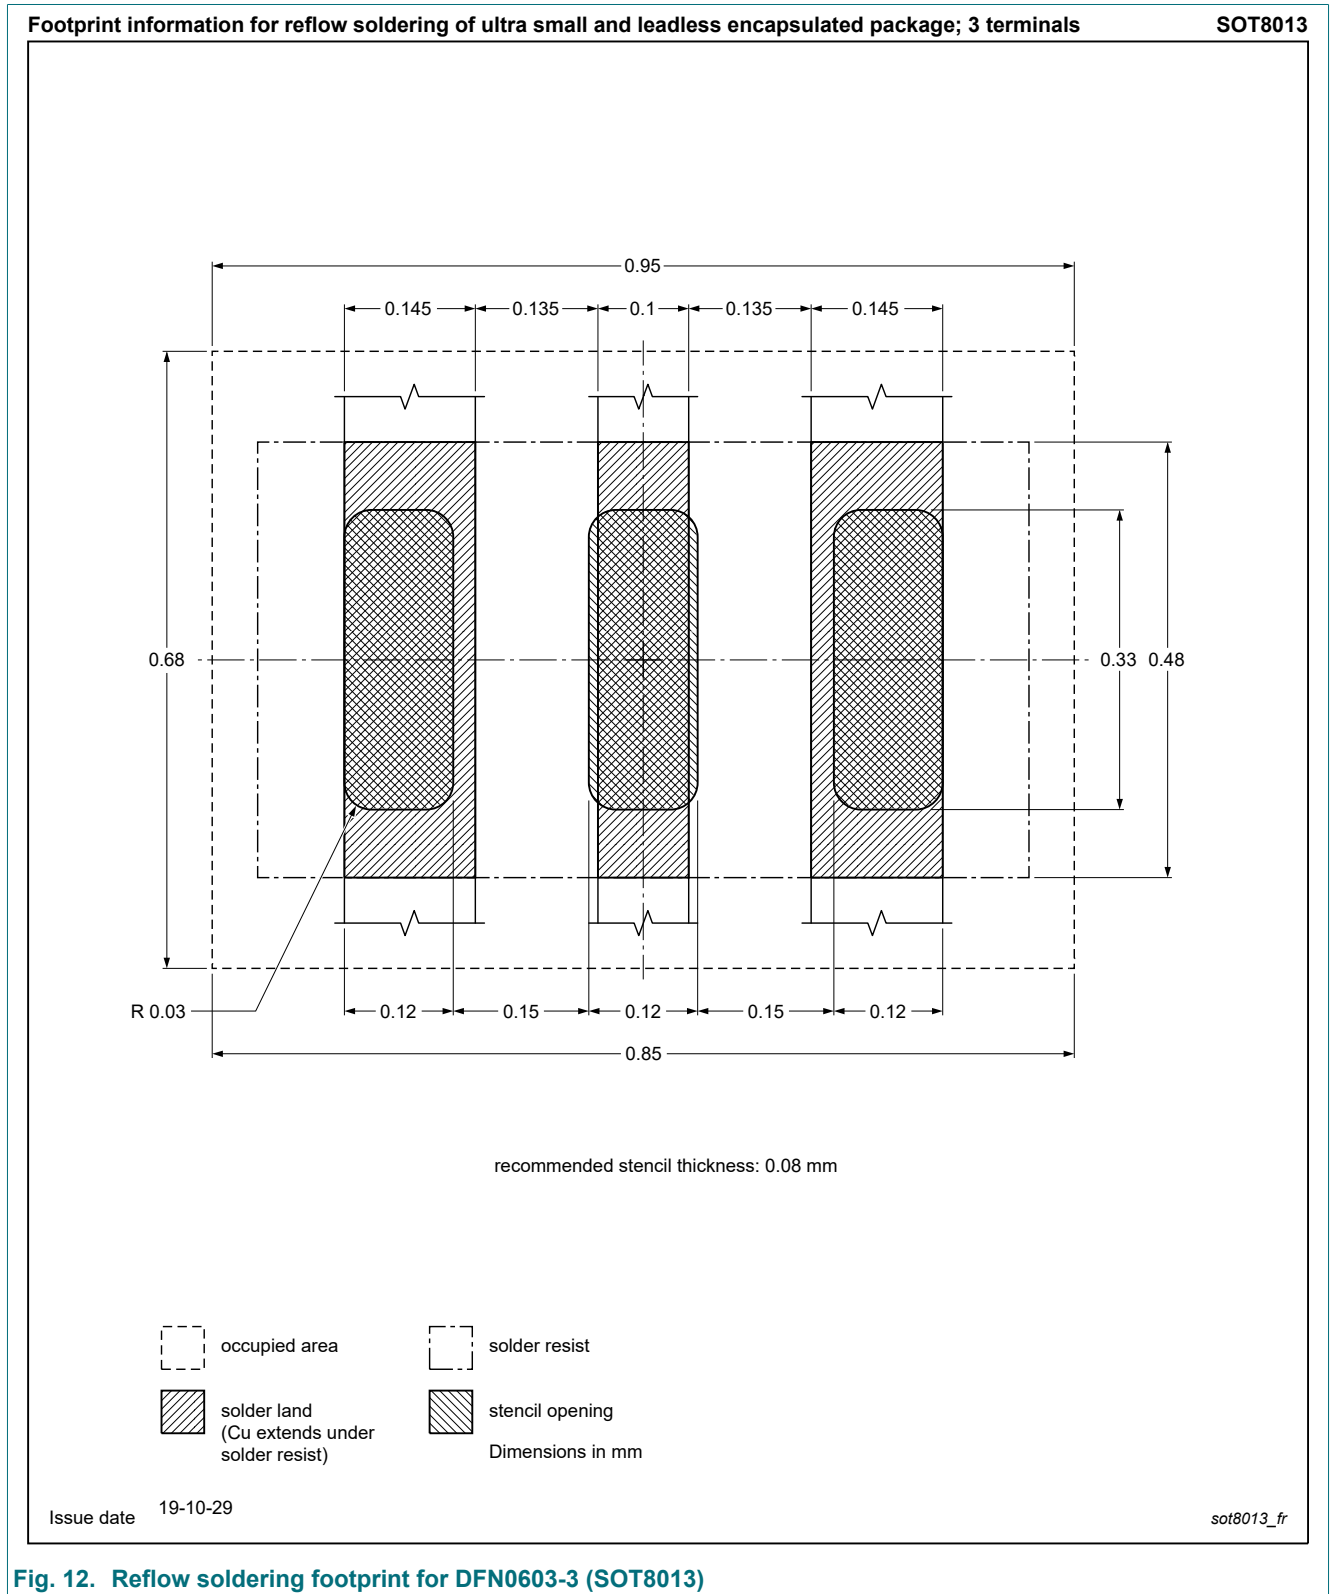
Reflow soldering footprint for DFN0603-3 (SOT8013)
